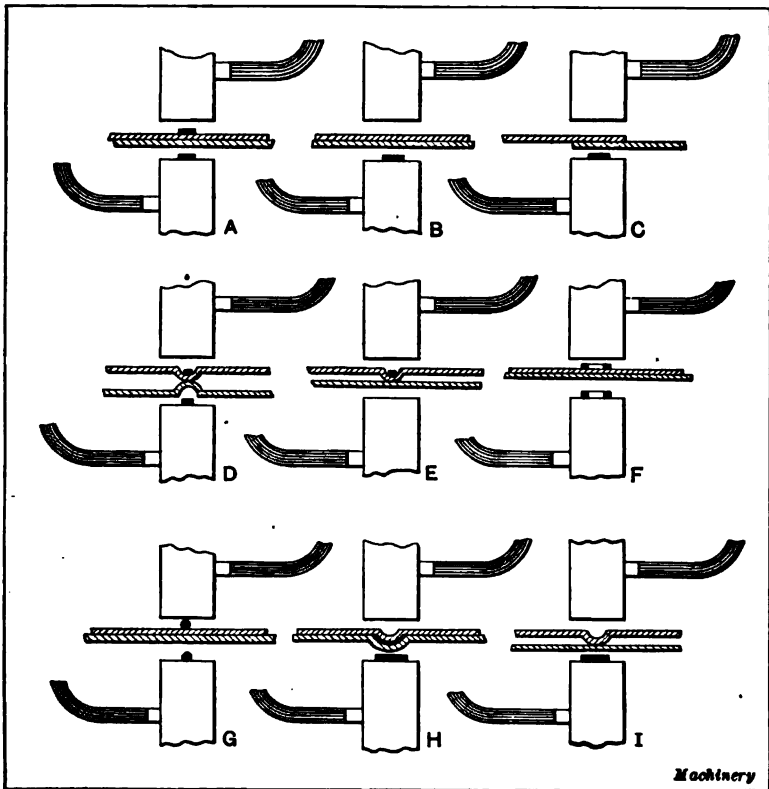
Diagram illustrating Various Processes employed in welding Two Sheets of Steel by means of Buttons
